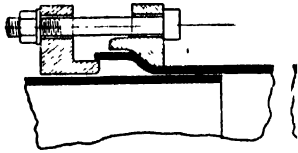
Expansion Joint for Welded Pipe
